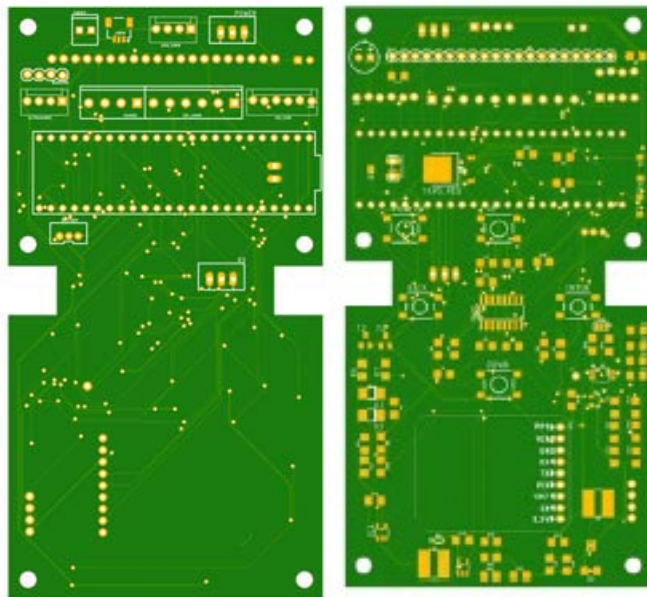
PCB V3 design: Right: Front, Left: Back
